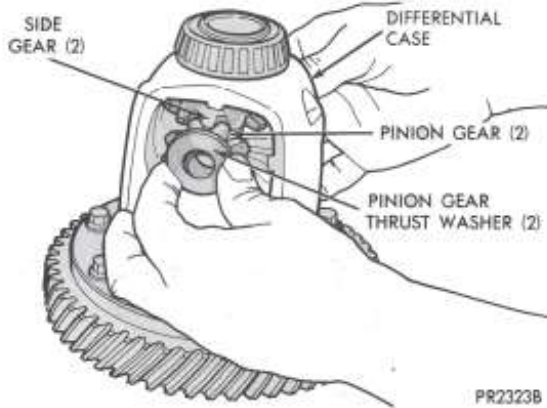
Remove or Install Pinion Gears, Side Gears, and 4 Thrust Washers by Rotating Pinion Gears to Opening in Differential Case
